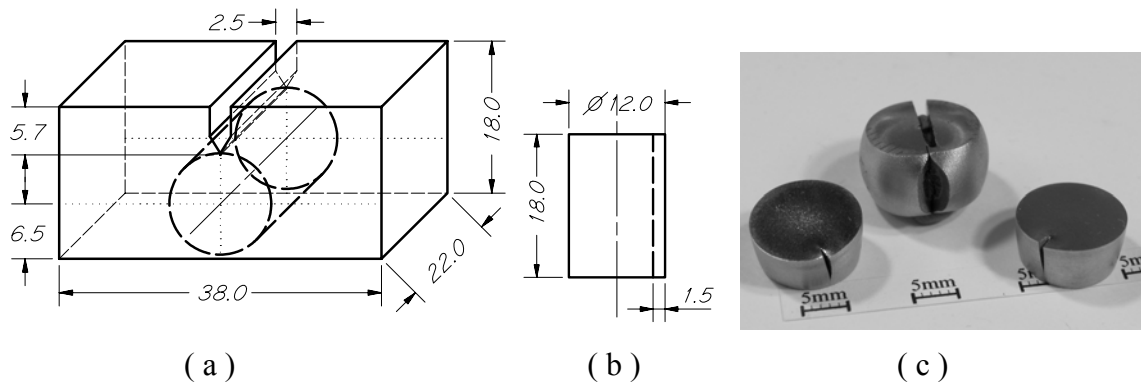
Sketched procedure to manufacture a cylindrical upsetting specimen with a vertical pre-crack (b) from a SENB specimen (a); (c) shows a compressed specimen and two halves of a split sample.
